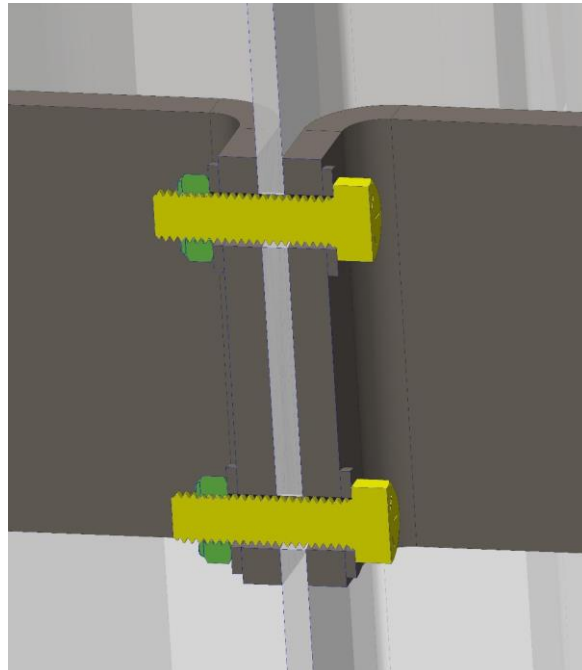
Two extension brackets bolted back-to-back with pallet wall door in middle.
